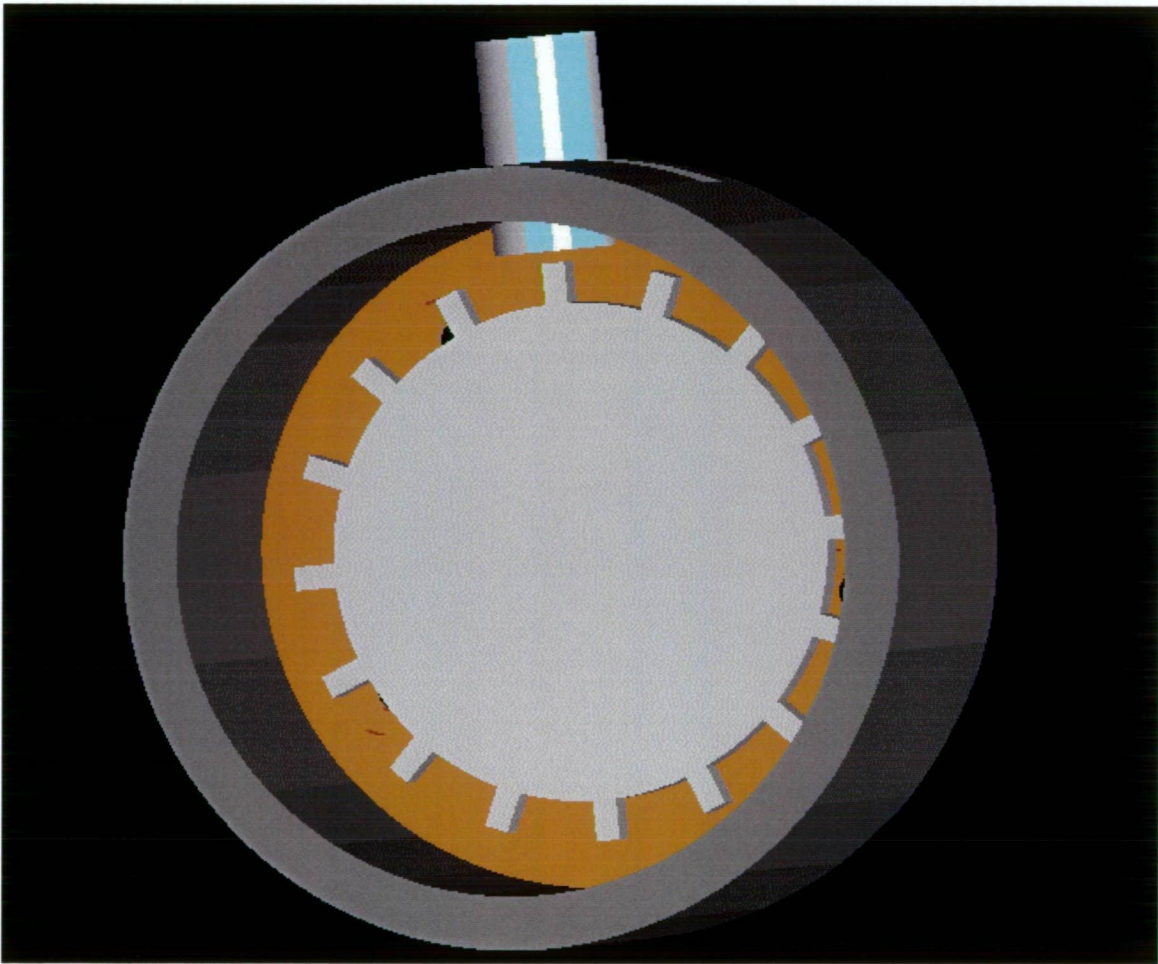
Gear tooth sensor, gear tooth wheel and housing design
